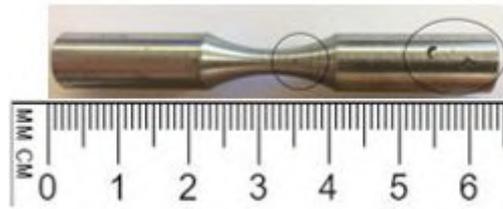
Test specimen taken from the yoke with pores (material welded and heat treated).
